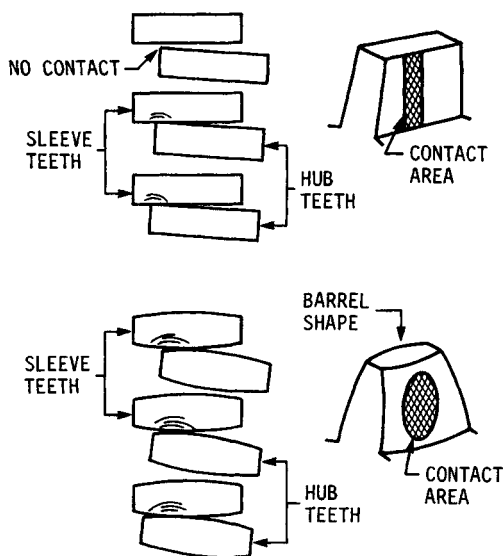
How double-engagement gear couplings accommodate angular, parallel, and axial misalignment.
